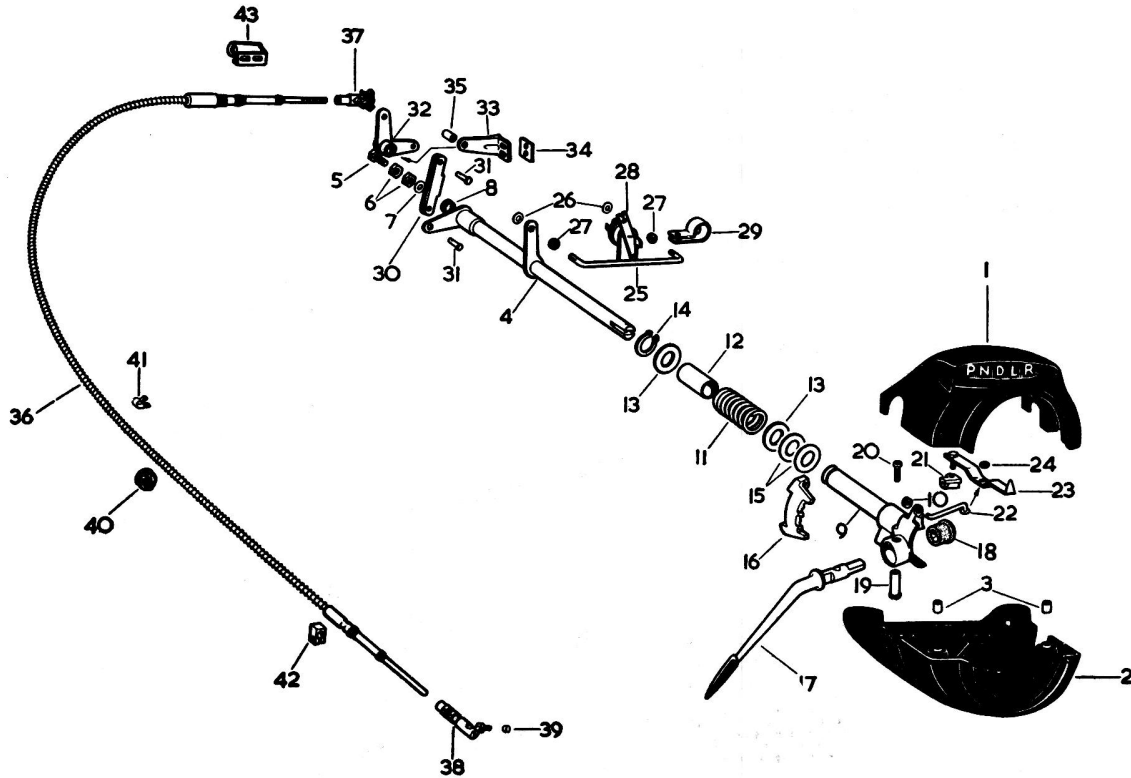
EXPLODED VIEW OF THE SELECTOR LEVER ASSEMBLY – TYPE DG UNIT
